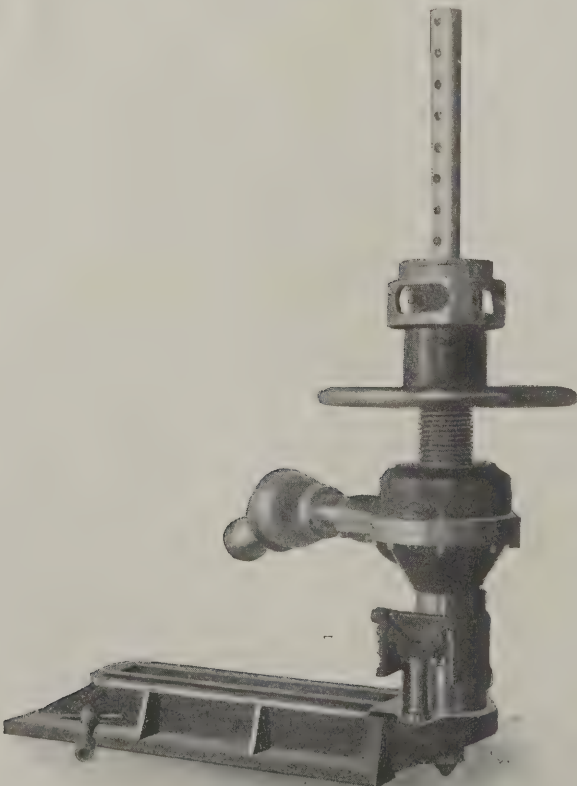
Drilling Spindle Clamped to Slotted Base and provided with Extensible Drill Spindle.
